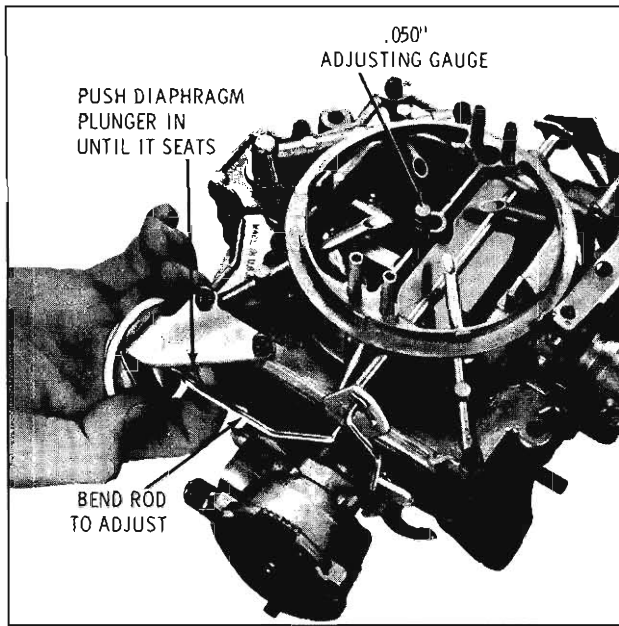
Vacuum Break Diaphragm Adjustment
